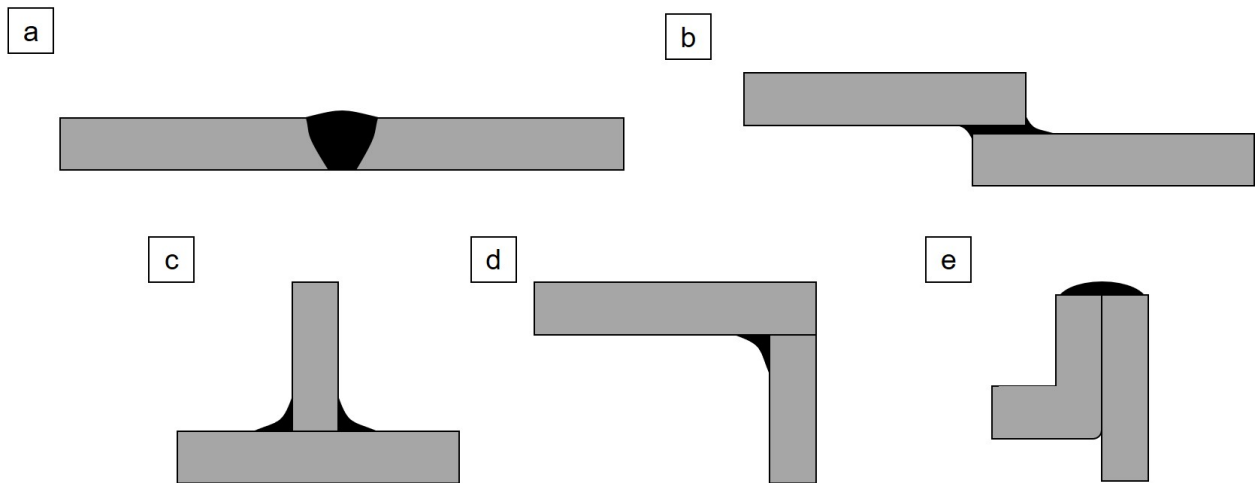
Diagram of a basic (a) butt joint, (b) lap joint, (c) tee joint, (d) corner joint, and (e) edge joint
